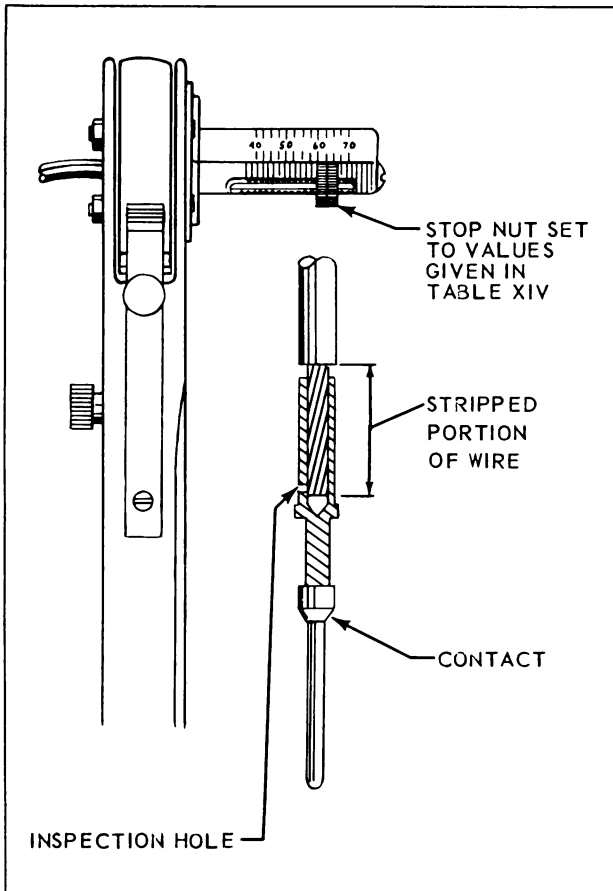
Adjustment of Bendix Scintilla 11-3284-1 Crimping Tool for Contact Length
